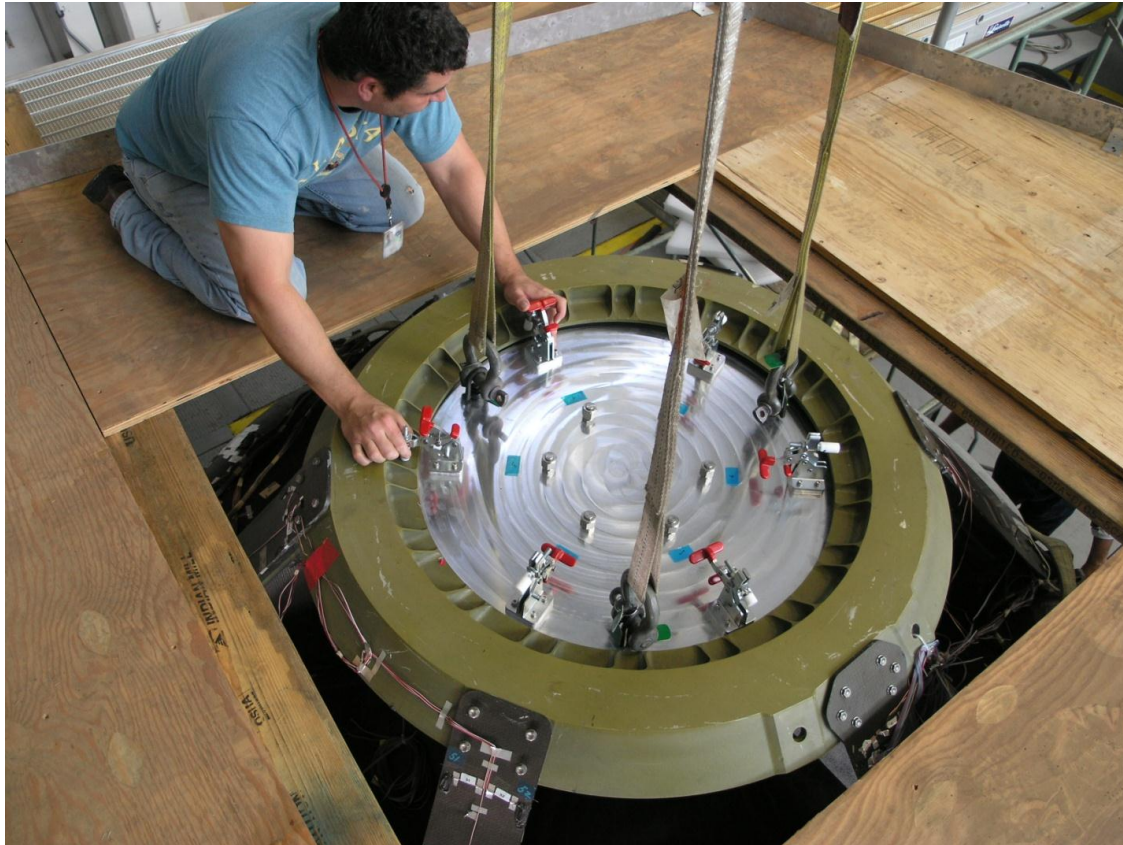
Docking Tunnel Hatch Cover Installation
